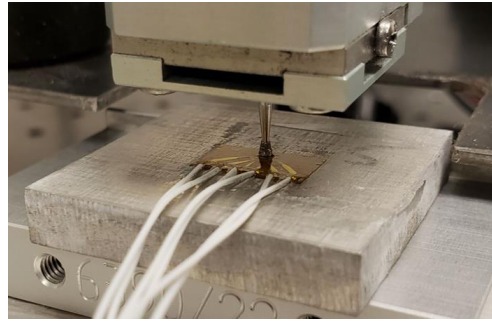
Hole drilling experiments set-up, showing the drilling tool in the center of the strain gauge rosettes
